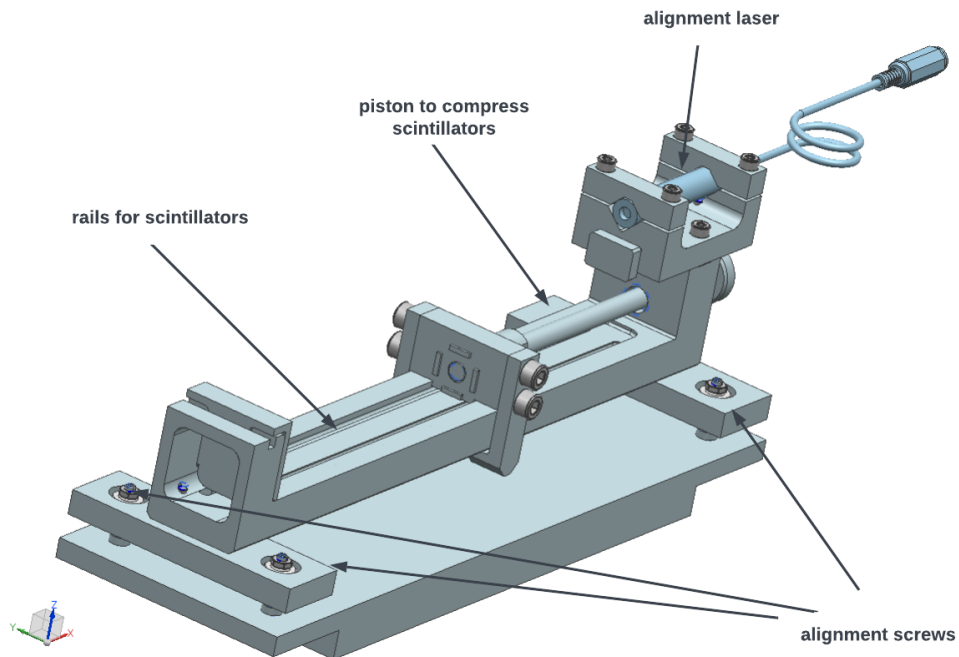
Sketch of the aluminium scintillator holder design. Scintillators would be placed in the rails of the central part and compressed by the piston. The laser system at the top of the holder is dedicated to keeping the calorimeter aligned.
